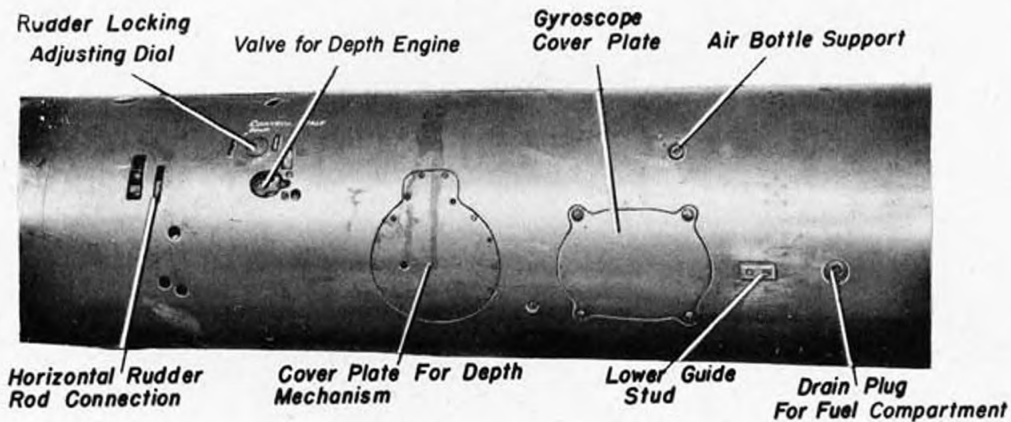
Torpedo Type 97, Flask Section, Bottom View
